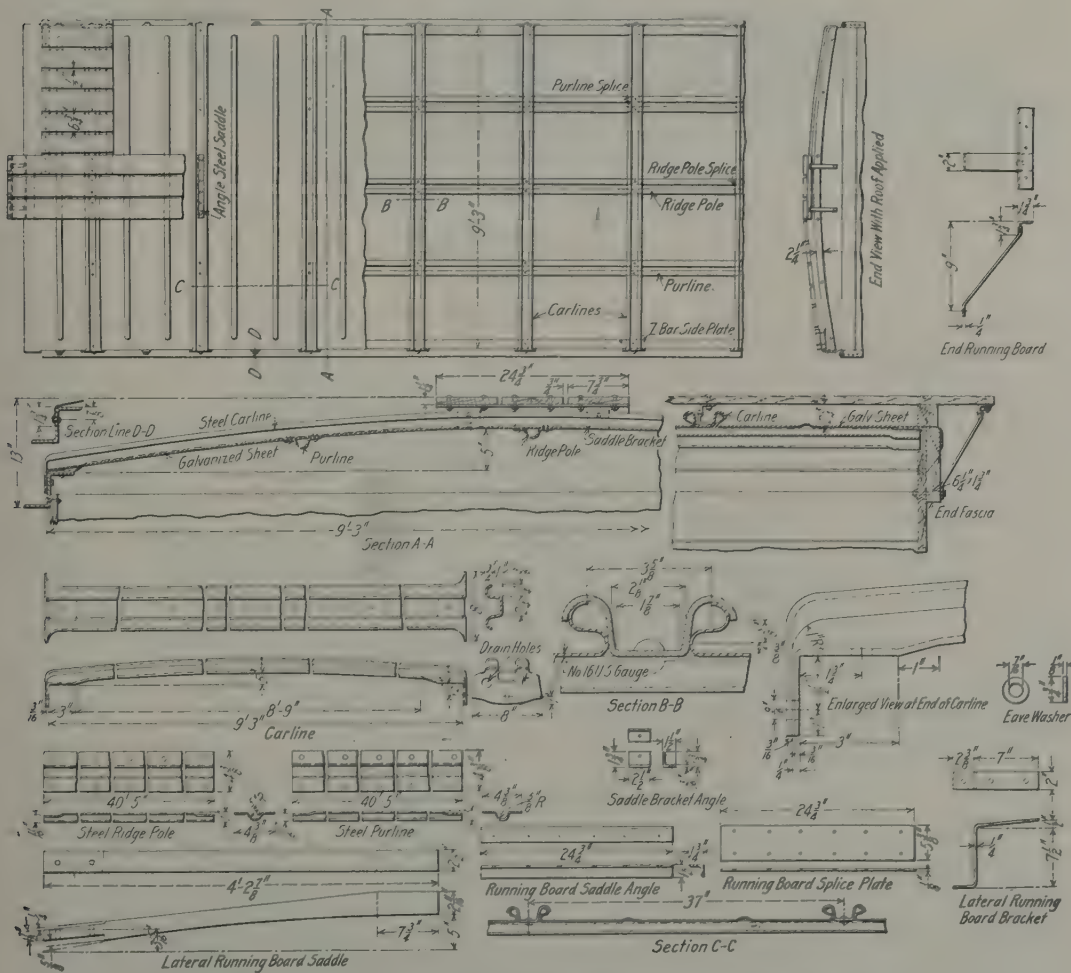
Chicago Common-Sense All-Steel Steel Carline Roof No. 100
